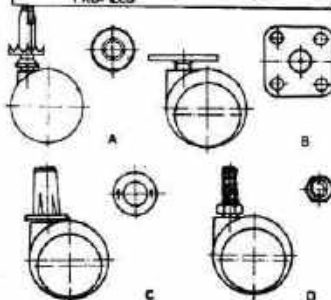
(A) DRIVE IN SCREW SLEEVE (B) SCREW ON PLATE (C) STEM AND SLEEVE (D) THREADED BOLT AND NUT
